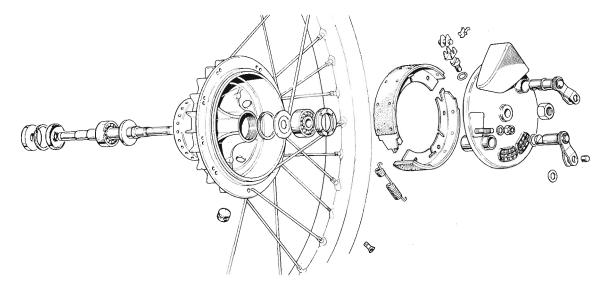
Exploded view of front wheel bearing arrangement (8 in. brake models)
